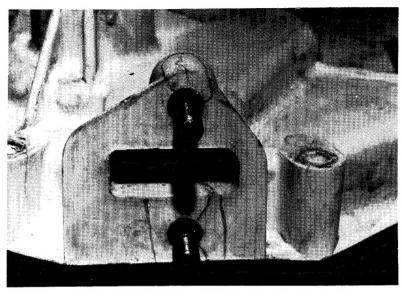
Front timing cover fuel flange showing typical cracking
